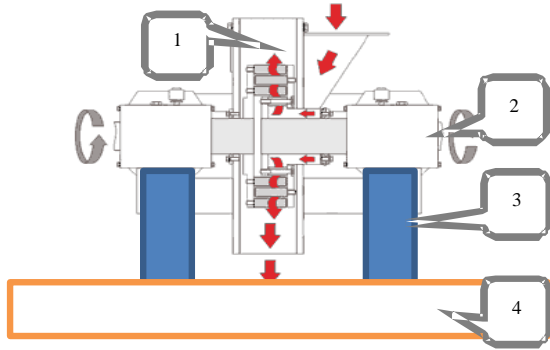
Disintegrator components: 1; working body; 2- electric motor; 3- vibration damper; 4- basis
